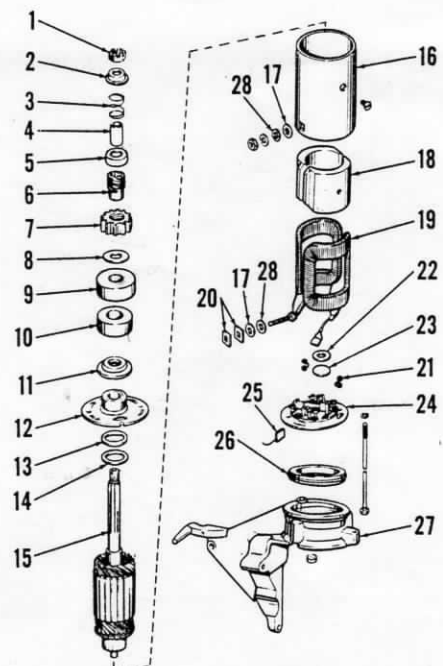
Exploded view of late type starter. Earlier starters are similar.
